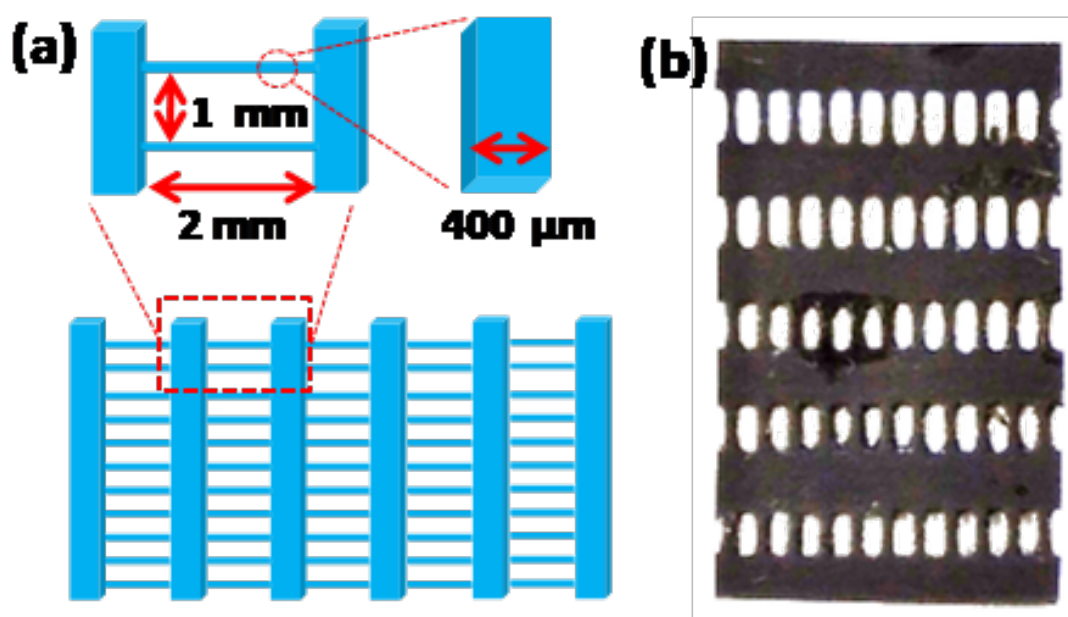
3D printed array of sensor pads. (a) 3D design of the object. (b) 3D printed object.
